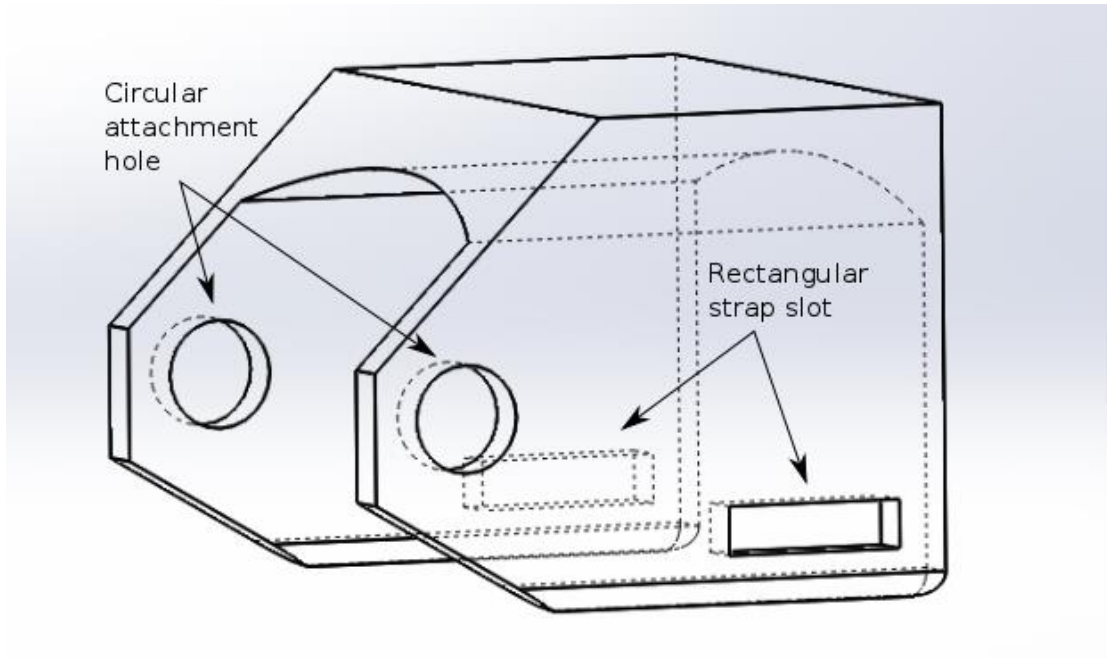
Rigid finger channel with a circular hole for attachment to other sections and rectangular slot for attachment strap
